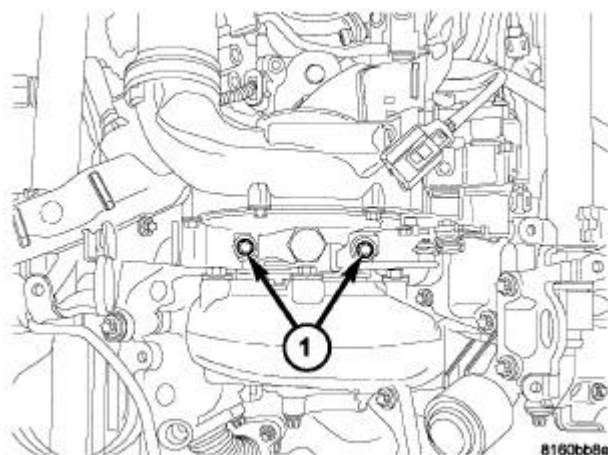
REMOVING/INSTALLING AIR INTAKE TUBE (AIR CLEANER TO TURBO)
